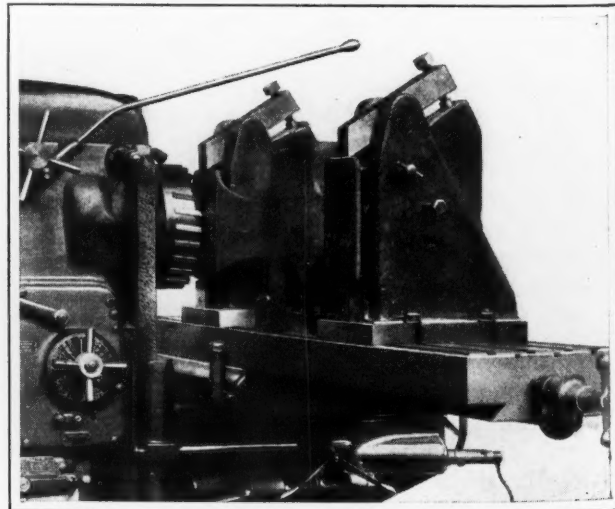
An Operation Involving the Use of Three Simple Work-holding Fixtures
